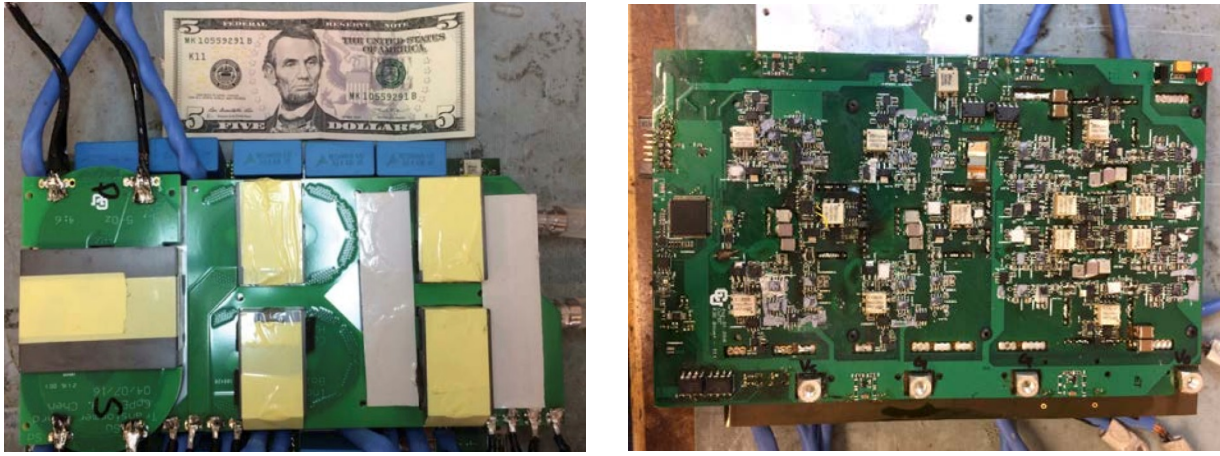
Assembled high-density composite boost converter laboratory prototype. Left: top side, with planar magnetics visible. Right: bottom side, with signal PCB visible.
